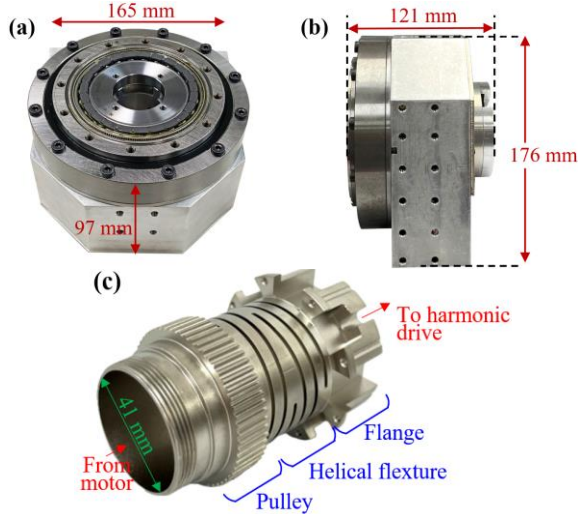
Robotic actuator prototype: (a) Front view (b) Side view (c) Compliant tube
